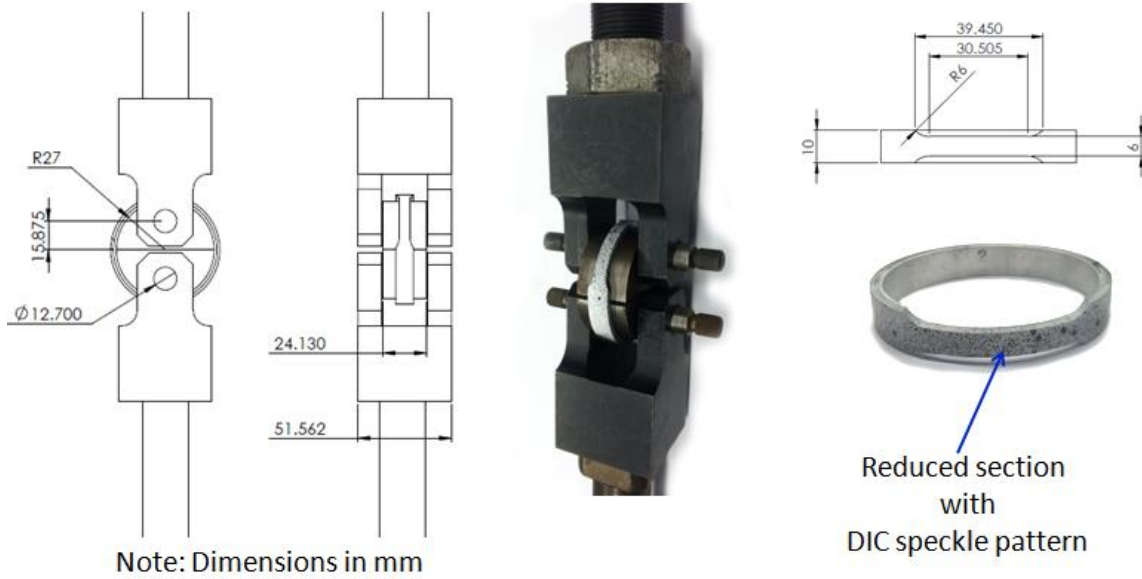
D-block assembly for circumferential tension test. The reduced section is oriented onto one half of the fixture.
